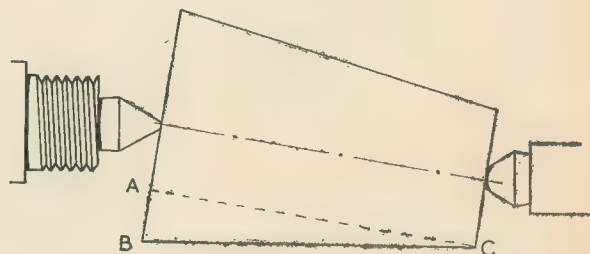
Calculating the amount of set-over for machining a taper of known angle
